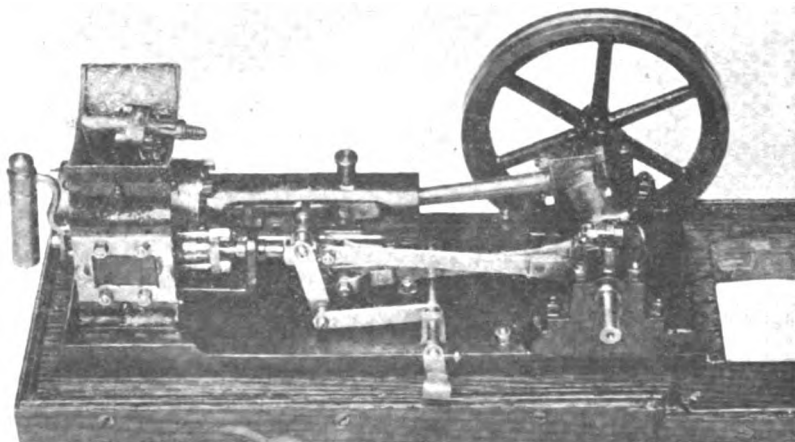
SHOWING ENGINE, BOILER REMOVED.
